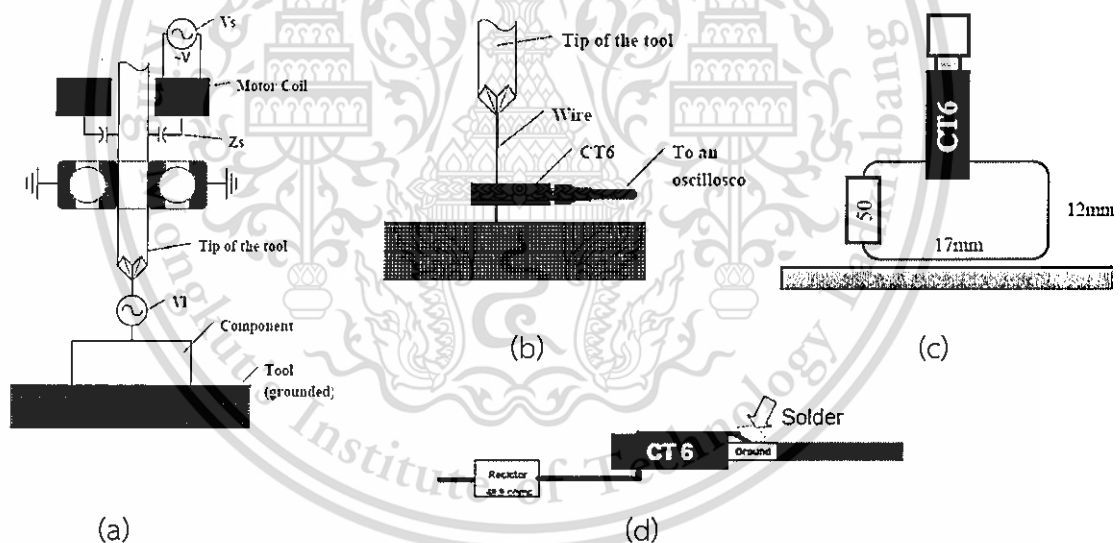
Example of EOS exposure measurement technique (a) generation of voltage in a tool via capacitance (b) current in gold ball bonding tool (c) current induced by transformer coupling in the tool (d) current exposure on direct contact with CT-6 probe. [7]
